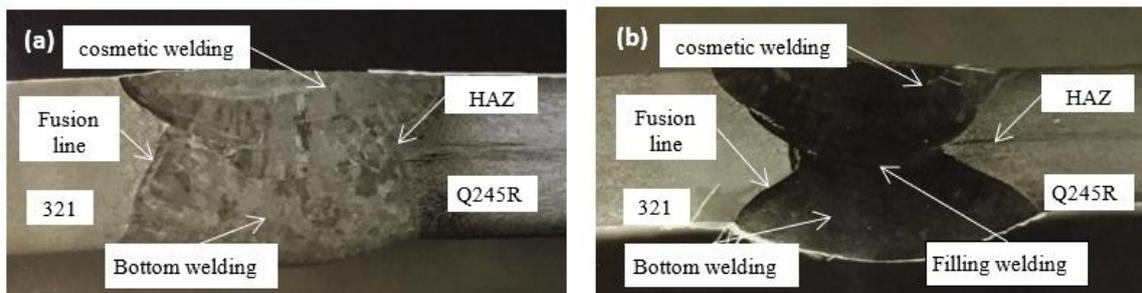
Macroscopic metallographic diagram of welded joint. (a) Macroscopic metallography of A-TIG welding joint (b) Macroscopic metallography of conventional TIG welding joint.
